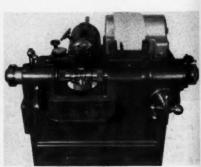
shows a front view of this machine, whereas Fig. 2 shows a close view of the hourglass worm being checked and the master roller employed. The sector or master roller carrier is centralized with the worm by means of a ball point plunger, held in the carrier and brought in contact with both sides of the worm thread. This sets the carrier in the correct position for both angle and center distance. A light bulb in the cabinet is provided for illumination to facilitate making this setting and to inspect the location of contact of worm and sector teeth or roller.
